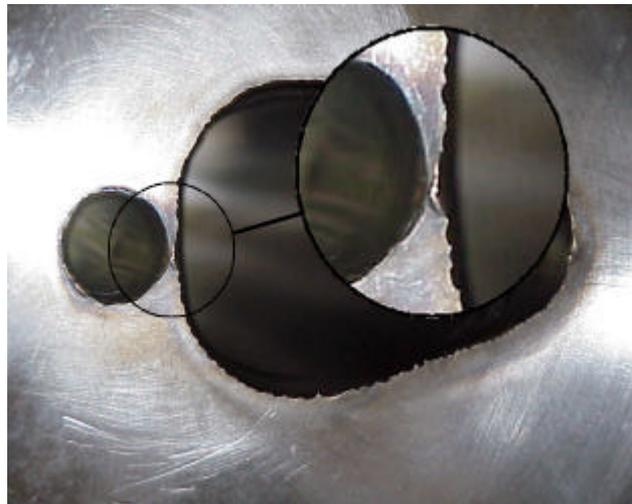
Storage ring thin septum tubes welded using the old method.
